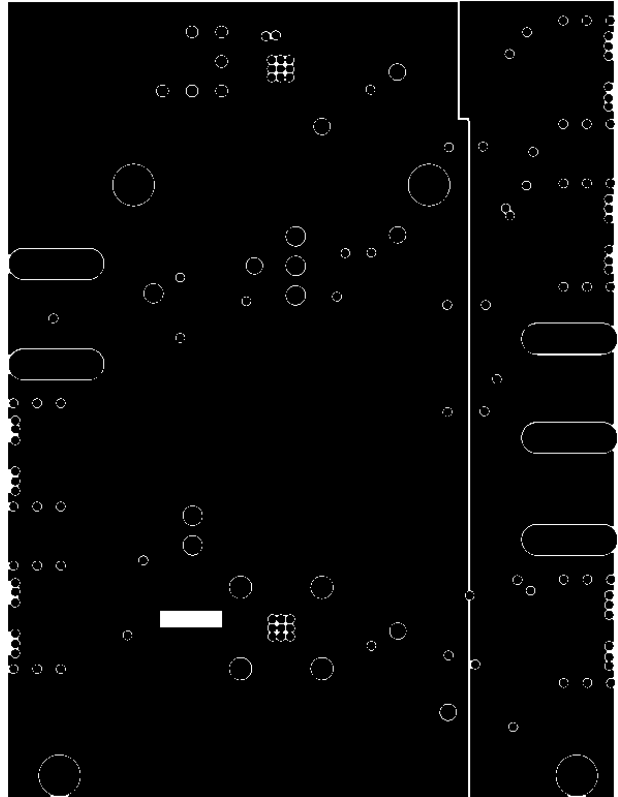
MAX3901 EV Kit PC Board Layout - Power Plane
